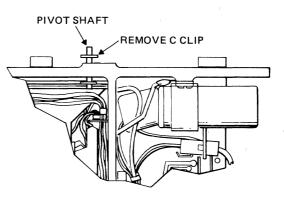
CARTRIDGE GUIDE REMOVAL
